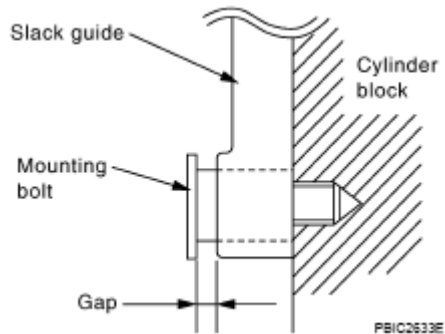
Identifying Clearance Between Mounting Bolt And Slack Guide
